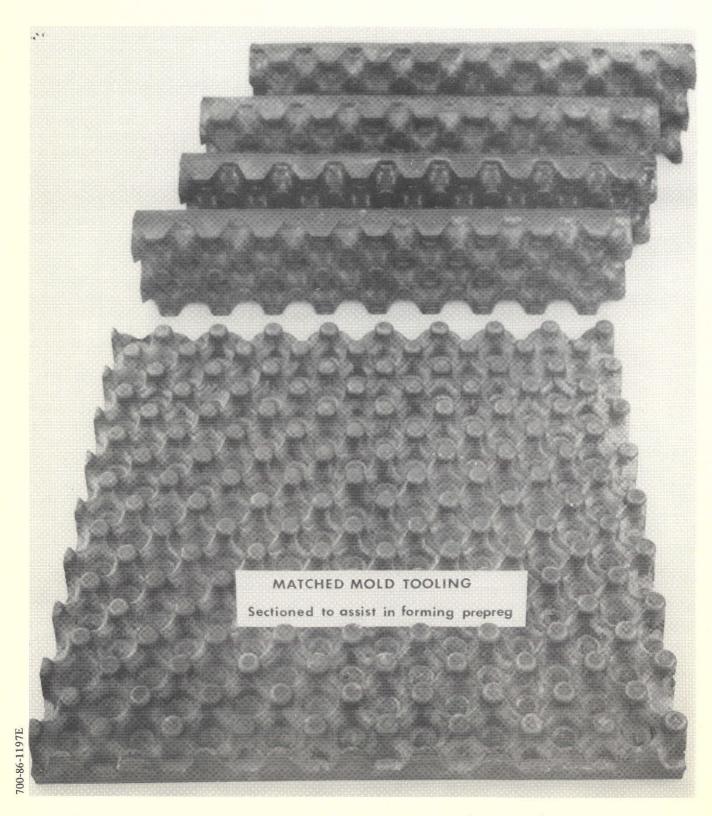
Matched Mold Tooling Used in Production of 3/4-in.-Thick Polyimide/Glass Core
